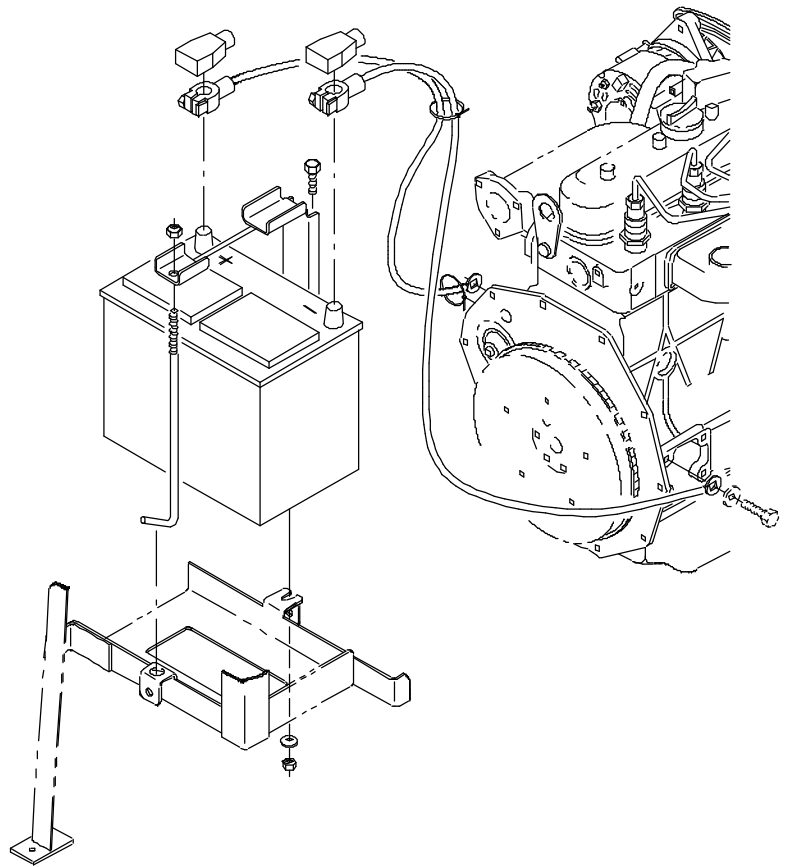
OLD BATTERY MOUNTING ASSEMBLY
